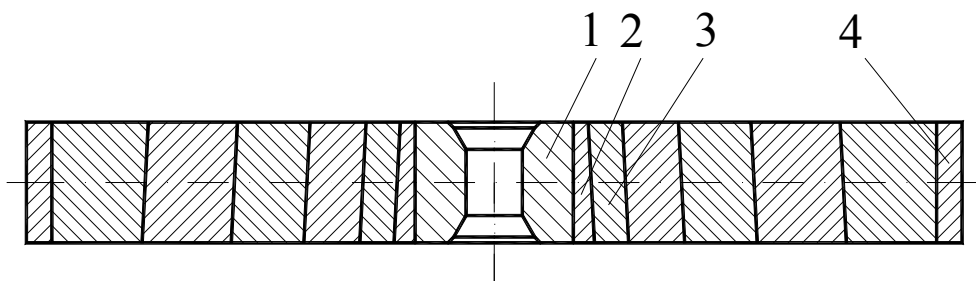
Die prestressed with rings. 1 - Die; 2 - First ring (cylindrical at inner surface and conical at the exterior surface); 3 - Rings with conical surface, using pressing for assembling. 4 - Protection ring manufactured from soft steels.
